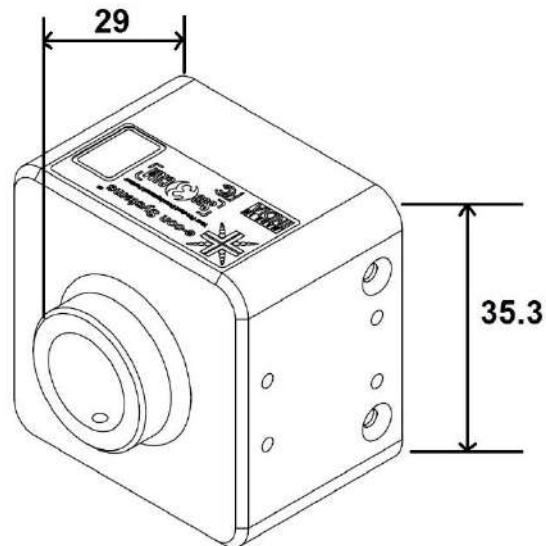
See3CAM_CU27 with Casing Dimensions (Without lens)
